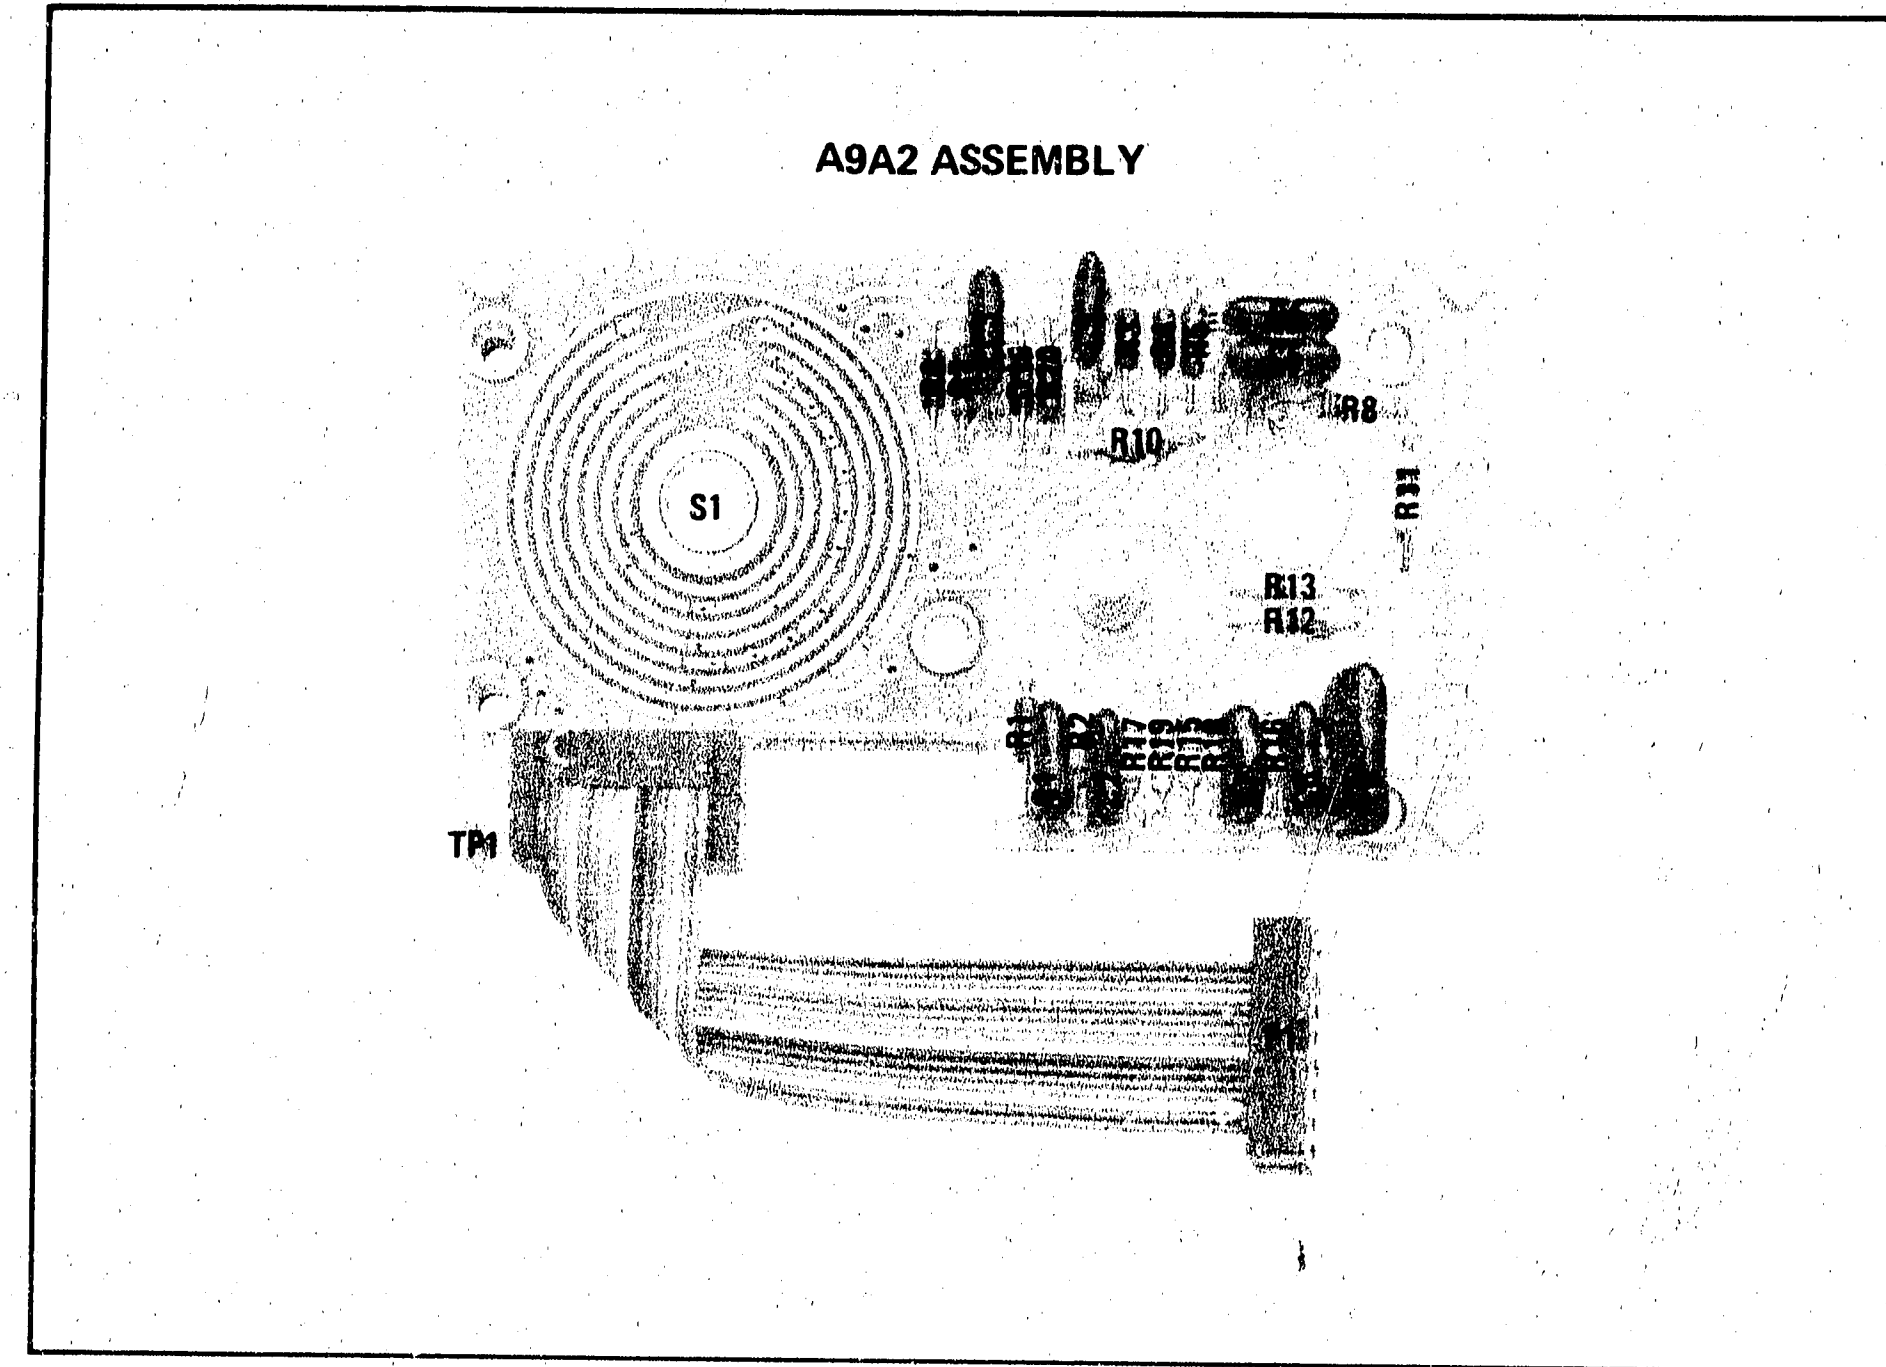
P/O A9A2 FM Gain Switch Board Assembly Component Locations
